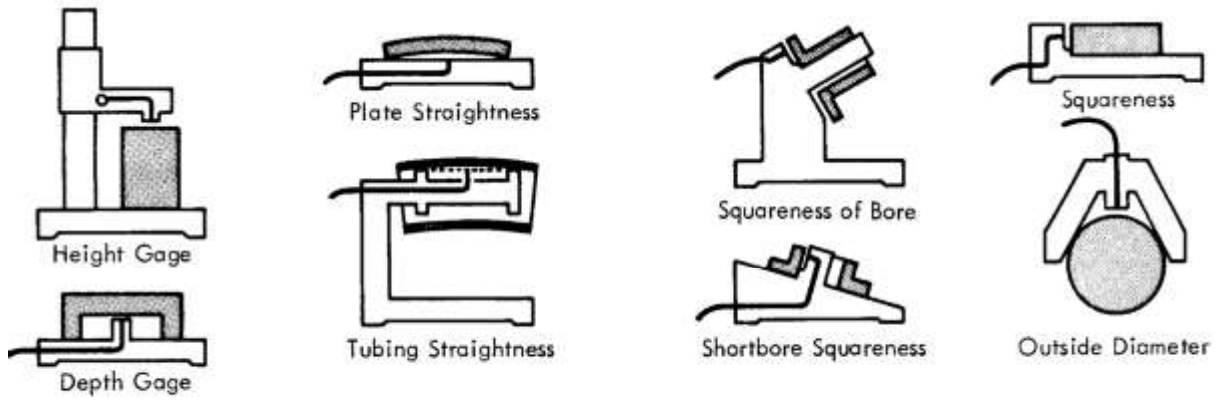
Single jet nozzles form the basic gaging element as in these examples.
